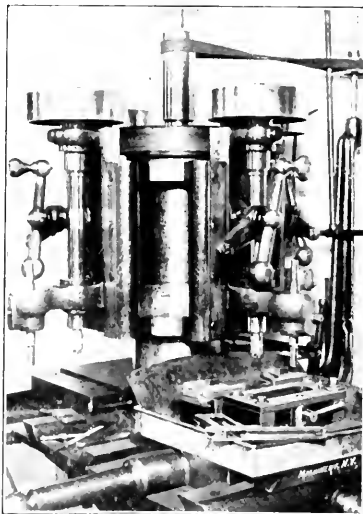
Four-spindle Profiler at Work on Receiver. Spindles have Friction Drive.
